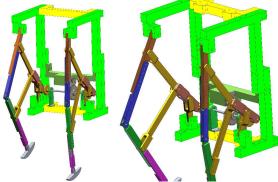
Details of mounting the mechanism elements on the upper frame.
